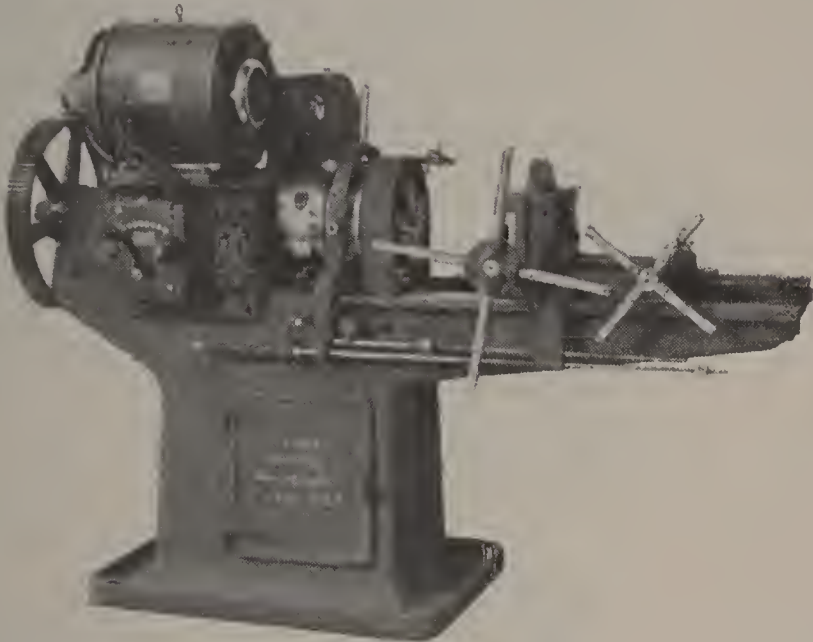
BOLT CUTTER, DRIVEN BY RELIANCE ADJUSTABLE SPEED MOTOR.
